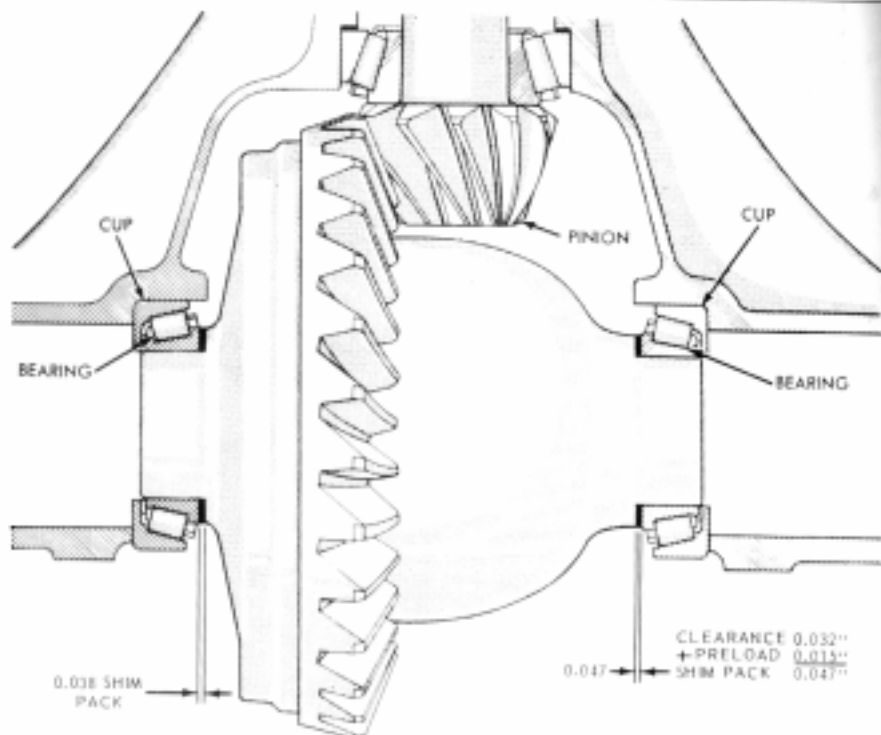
Differential Bearing Preload and Ring Gear Backlash
